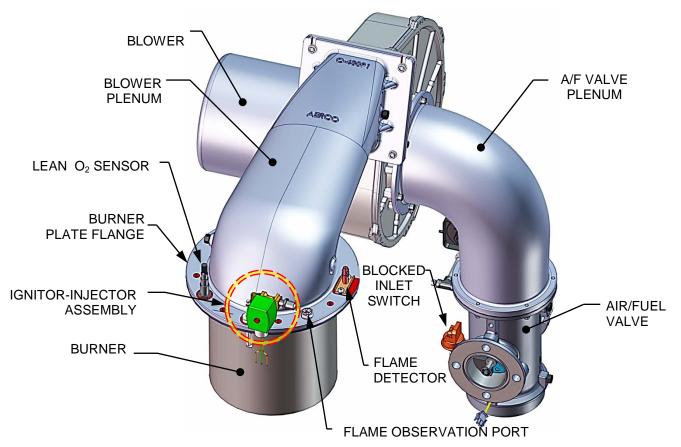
BMK 2500/3000 Burner Assembly (Removed from Boiler)
